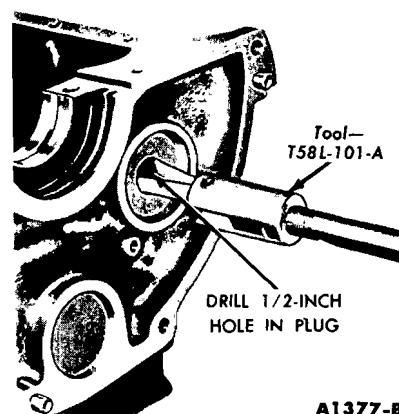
Camshaft Rear Bearing Bore Plug Removal
